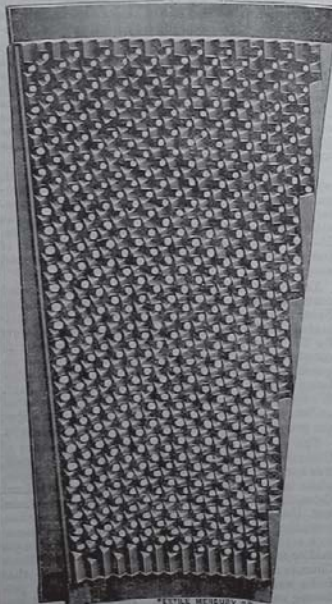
SECTION OF IMPROVED BEATER GRID.
